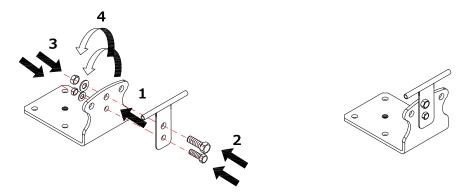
Assembly of the LVB/LVBD device with fixed straight cable support for glider (Cod. 001346)
